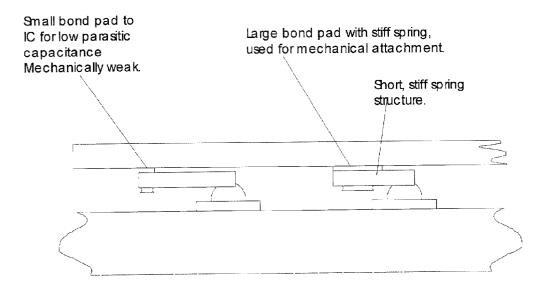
Alternative embodiment. Showing how a spring or compliant electrical connector and matching bond pad (left) may be reduced in size to provide an interconnection with lower parasitic capacitance. A separate, more robust structure (right) may be used to provide mechanical attachment of the IC or MEMS chip to the substrate, including but not limited to PC board, MCM substrate, silicon substrate, sapphire substrate, and glass substrate.
